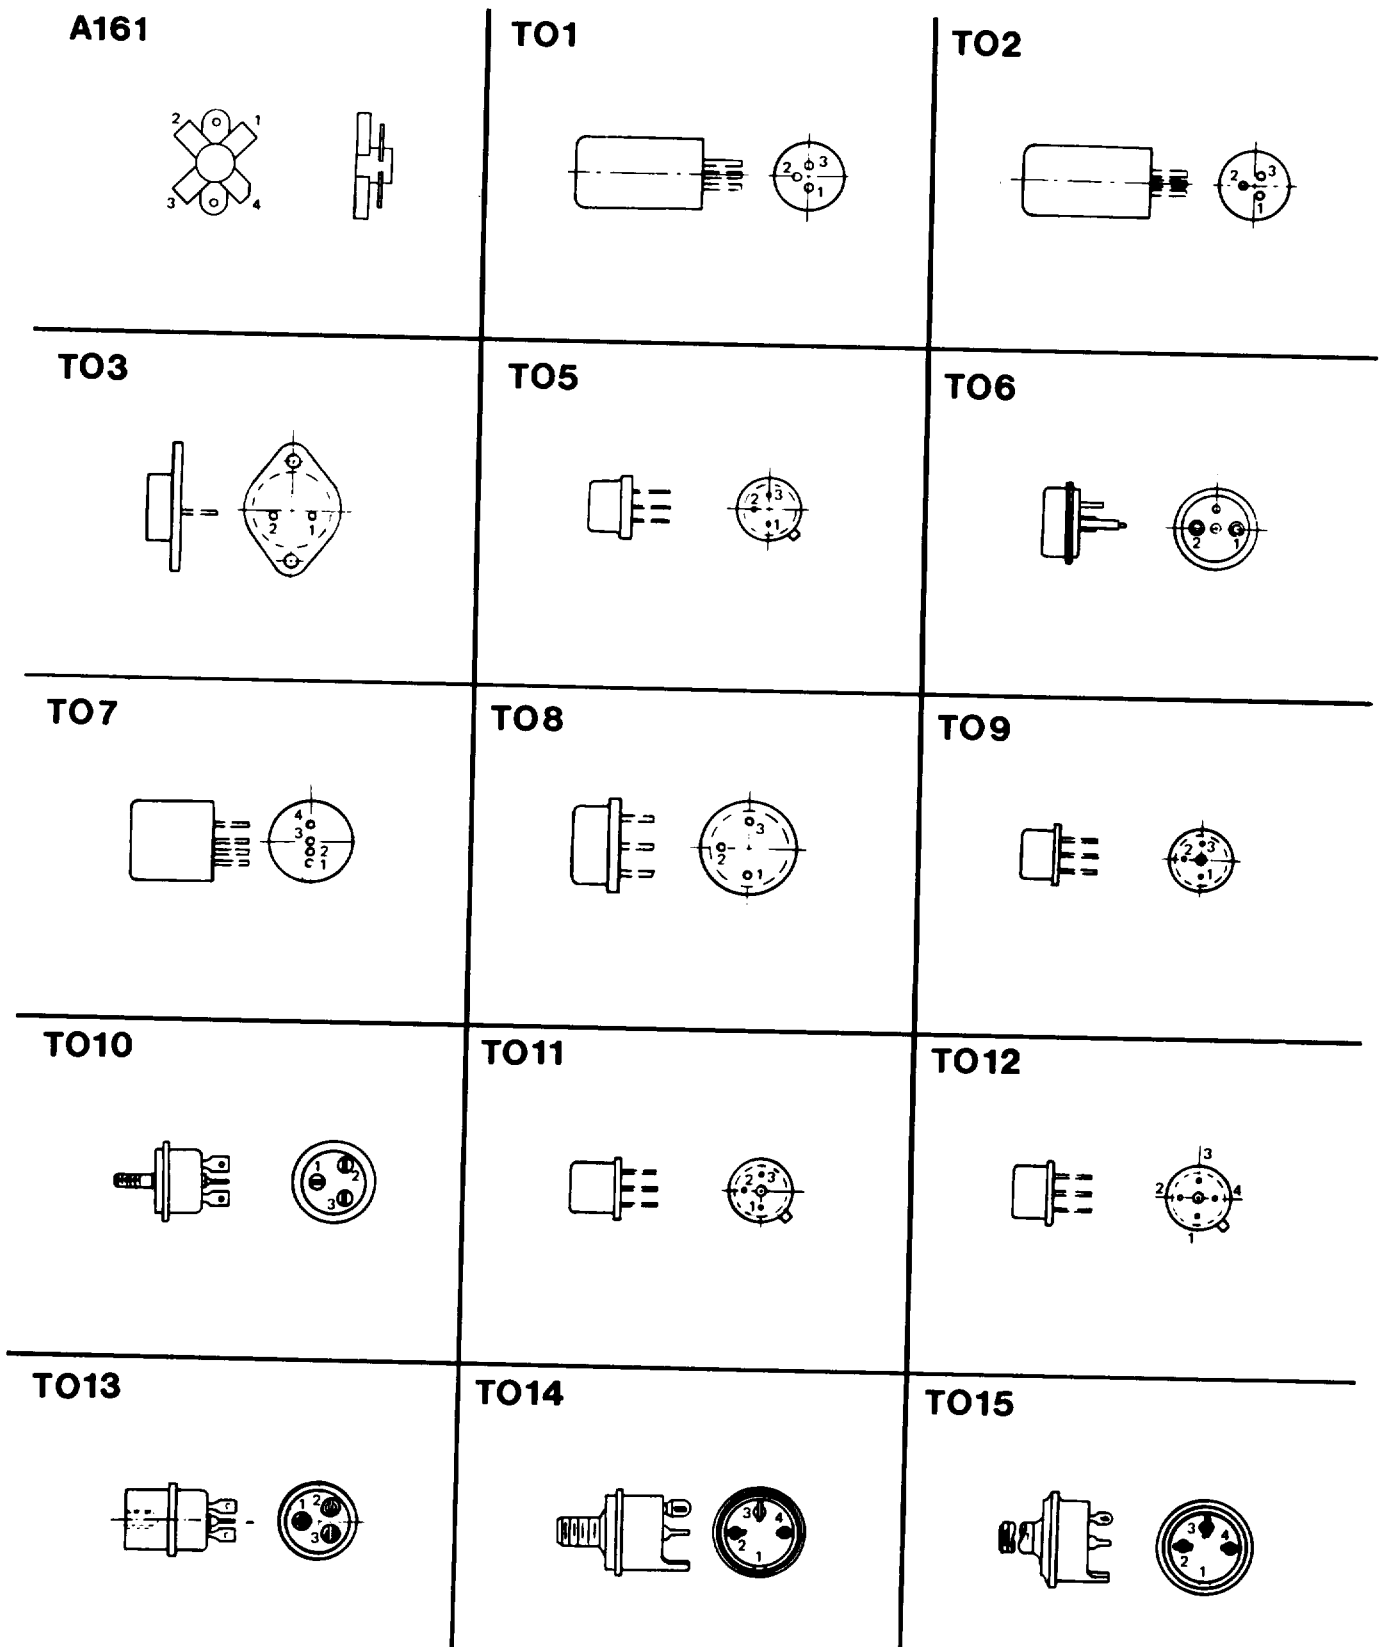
(5). Transistor outline drawings (Sheet 5 of 12).
